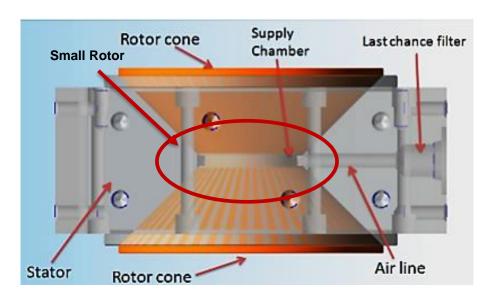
CAD Model Bi-Conic Air Bearings [12]
